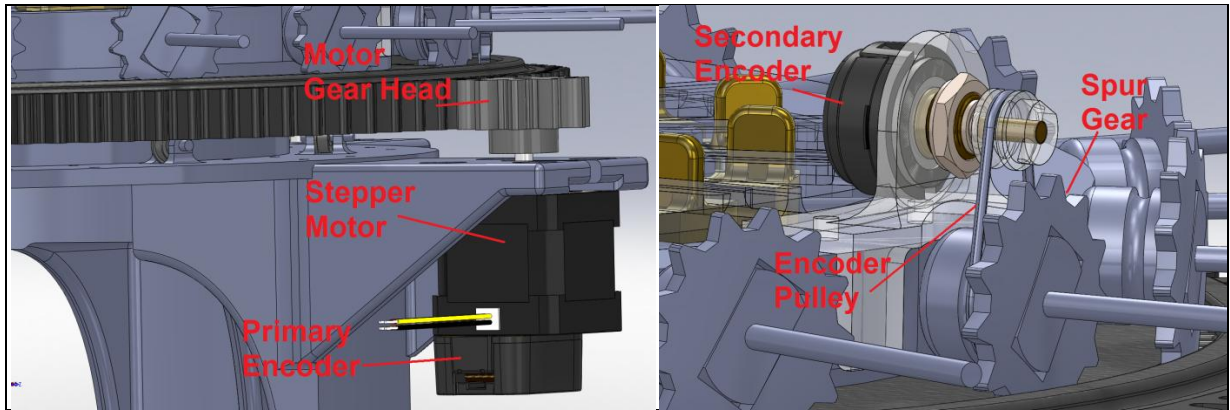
Primary motor encoder (left) and secondary shaft encoder (right) placements.
